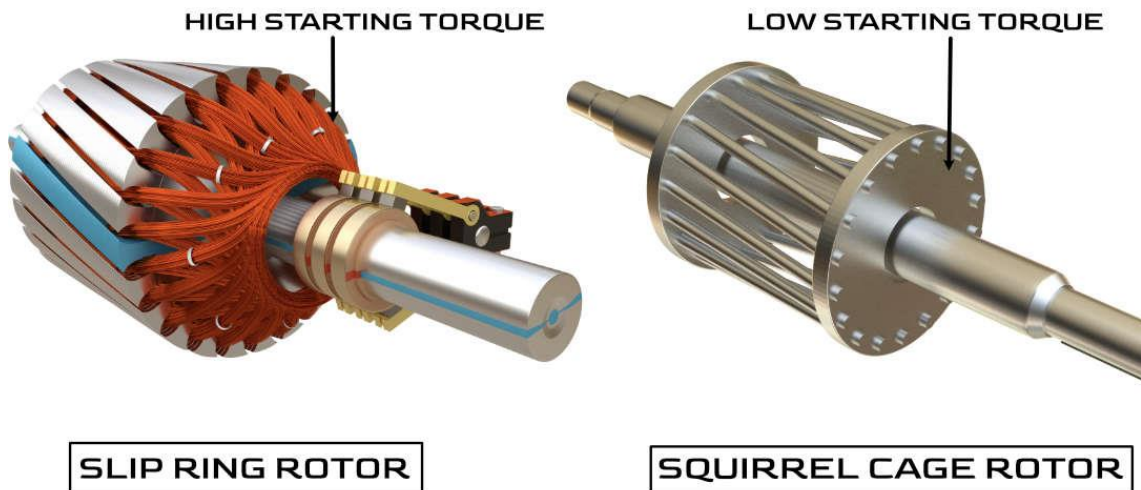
Slip ring (wound rotor) and squirrel cage induction motor rotors [13].
